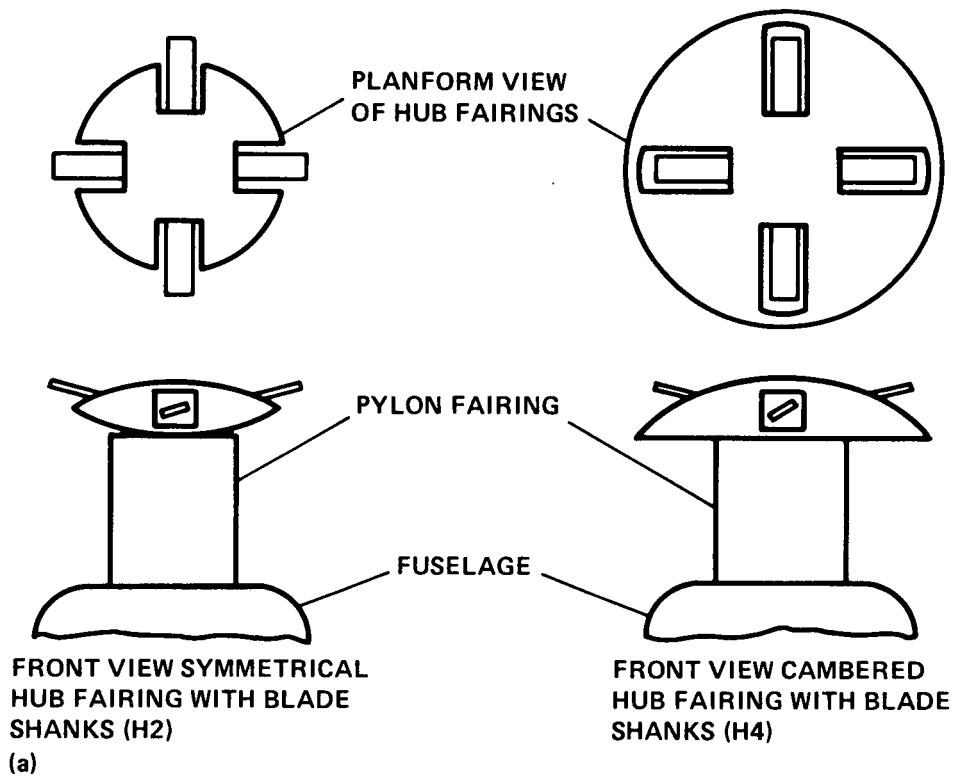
Hub fairings with blade shanks incorporated. (a) Front views of the test configurations with blade shank Sets #1 and #2.
